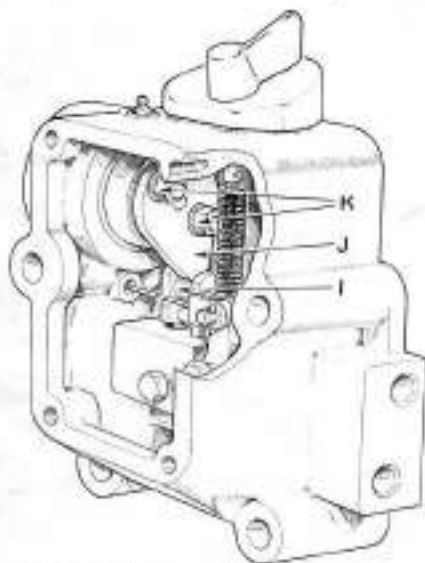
Adjusting rocker shaft cam; refer to text for adjustment procedure and specifications.
